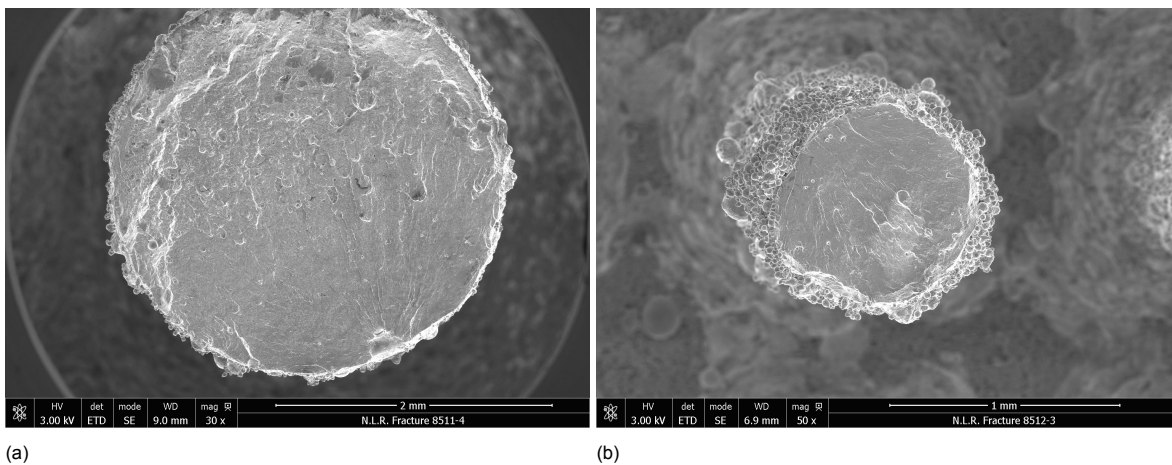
Large fatigue fracture surface areas on (a). sample 9-3mmØ-04 and (b). sample 81-1mmØ-03
